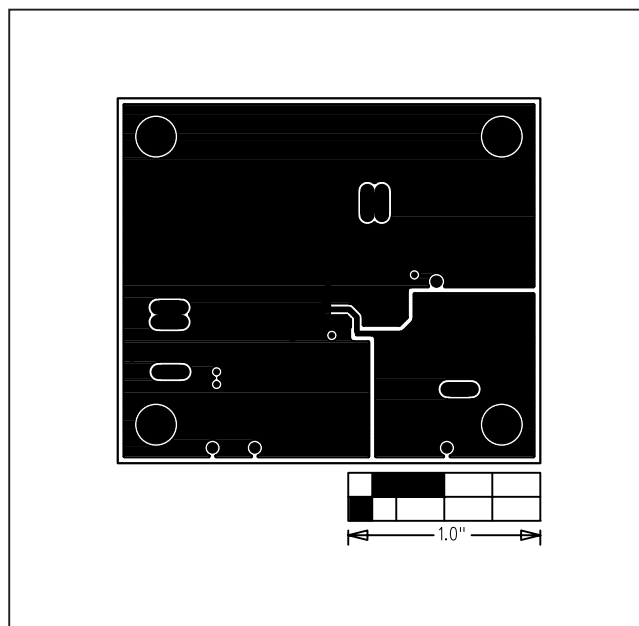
MAX15040 EV Kit PCB Layout—Inner Layer 2
